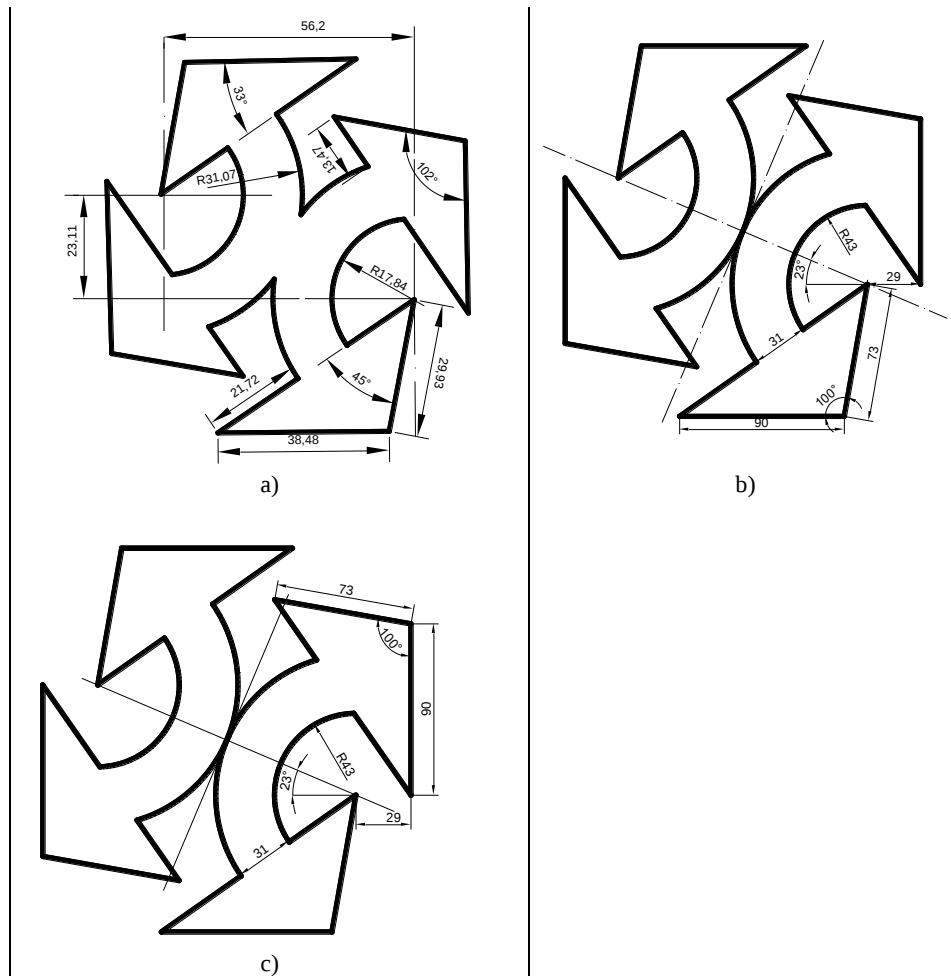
a) initial drawing; b) revised drawing with dimensions re-annotated;
